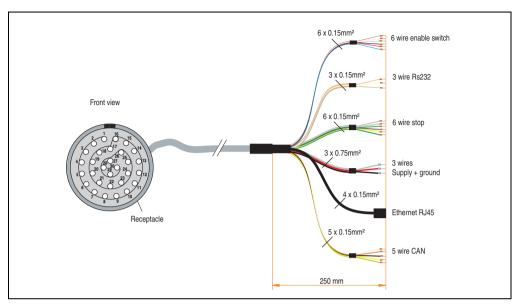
Cable layout - switching cabinet cable 5CAMPC.0020-11
